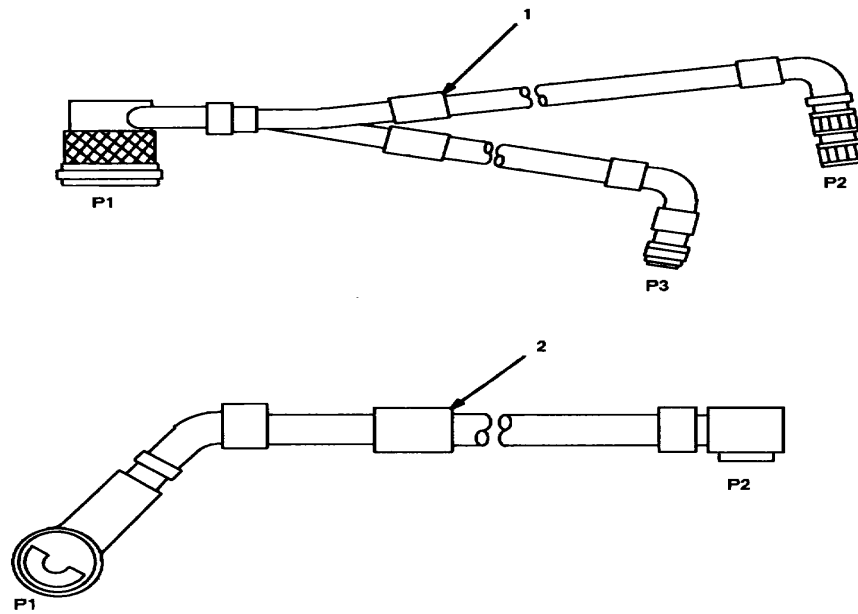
TSEC/KY-57 Illustrated Parts List
